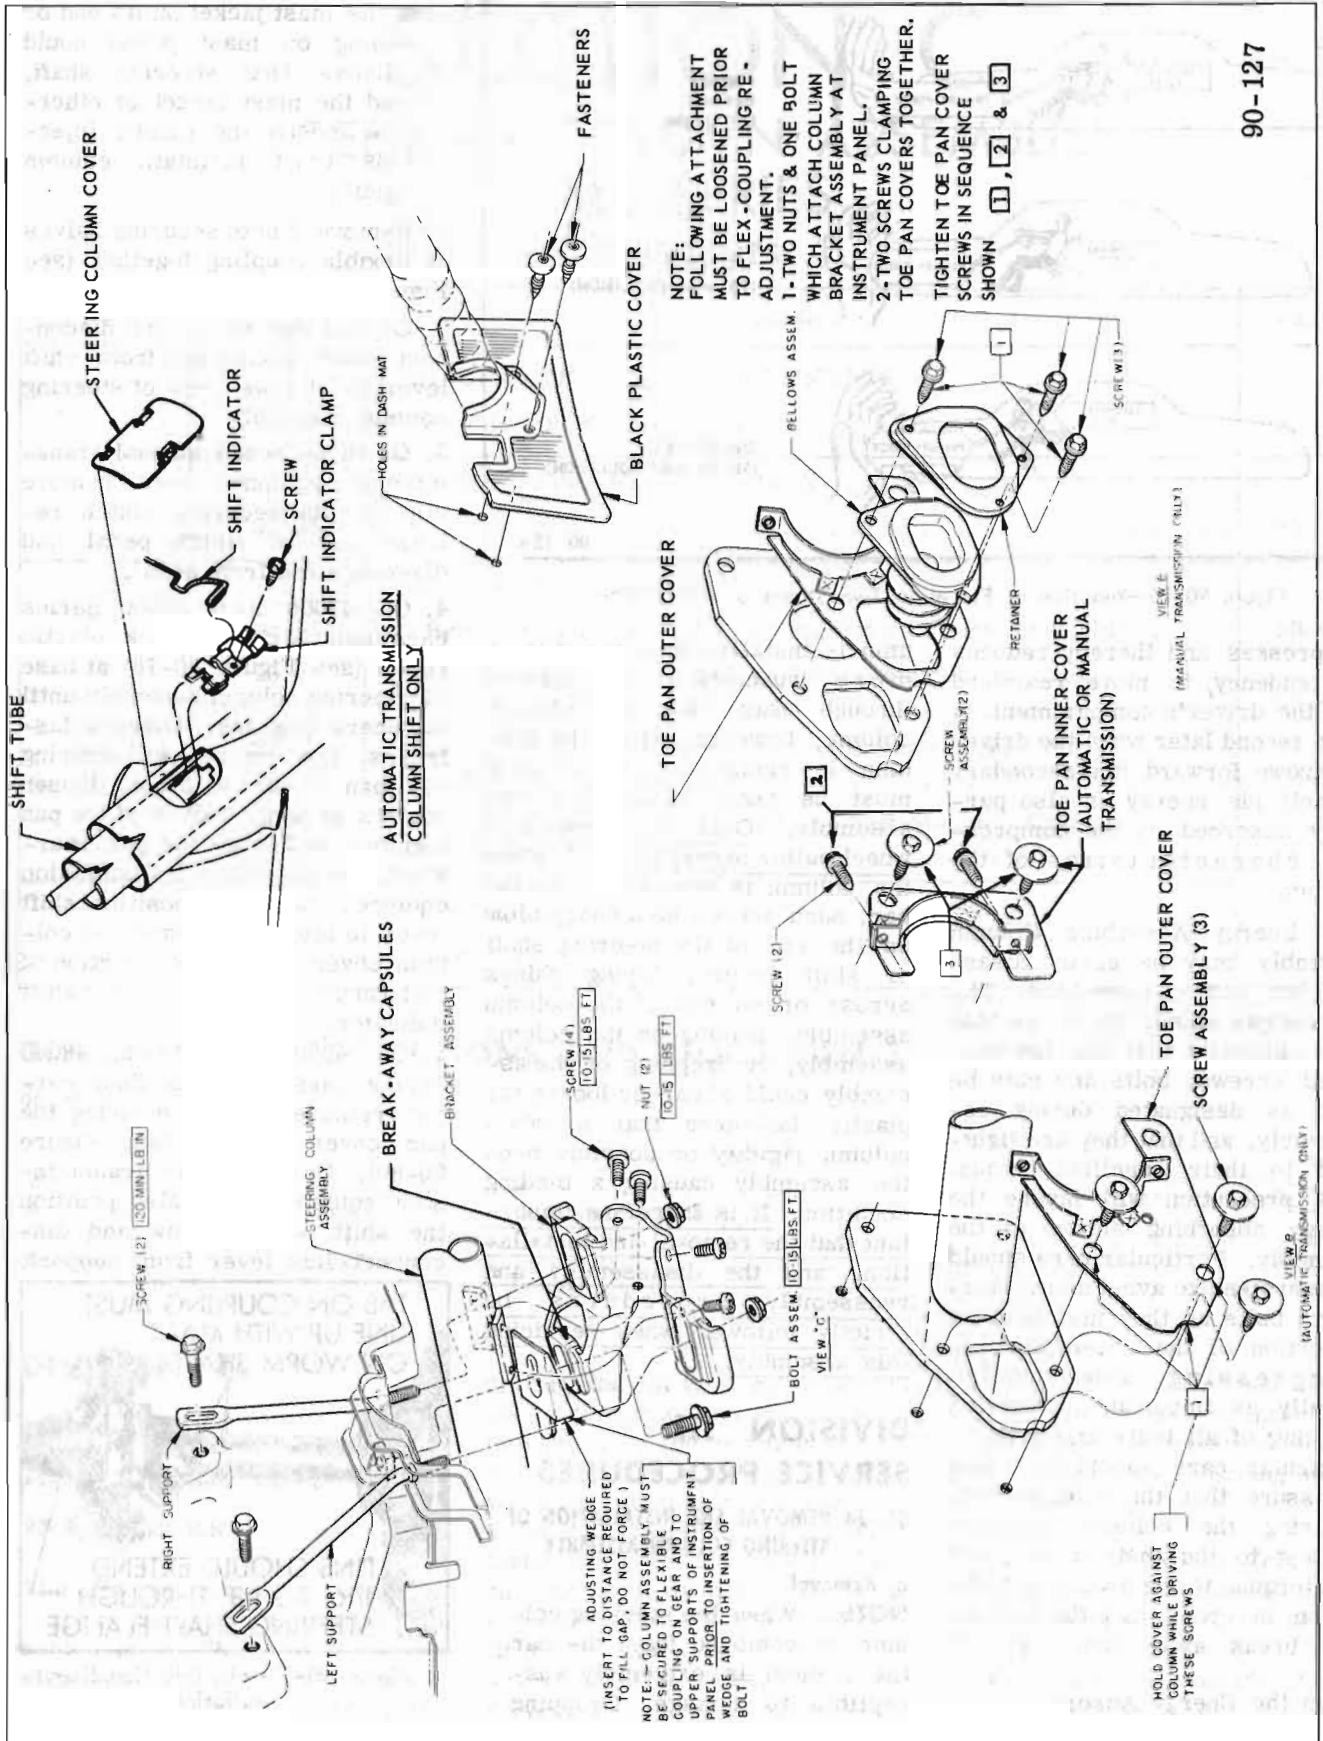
Steering Column Installation (45000, 46000 and 48000 Series)
